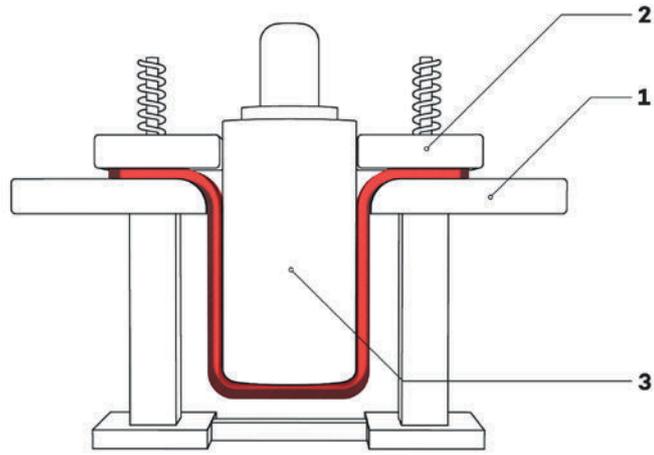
Slip-pressure forming without a female mold; spring-loaded hold-down ring (1), clamping ring (2), plug (3).
